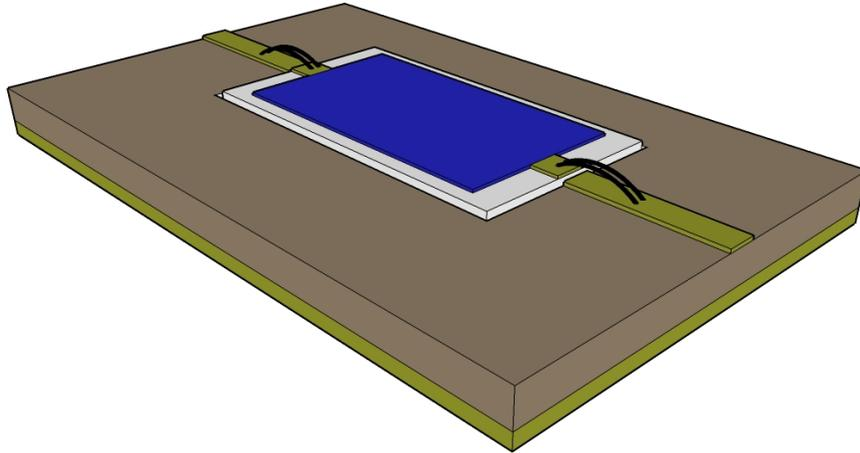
KTVA –KFA Wire Bond on PCB and solderable Ground plane
